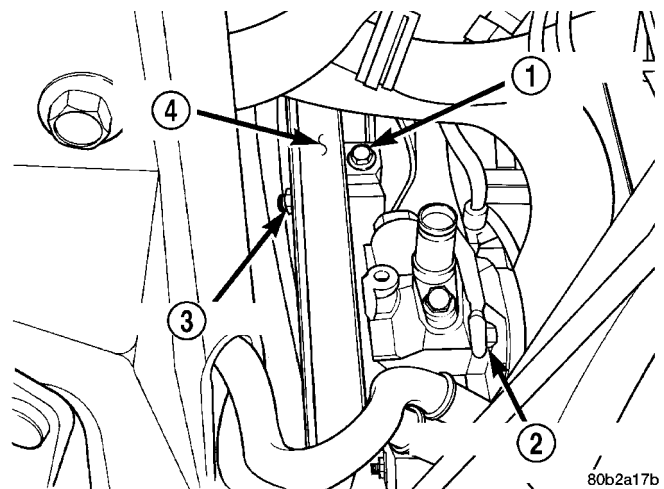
Drive Belt Tensioner Lock-Nut And Adjustment Bolt
